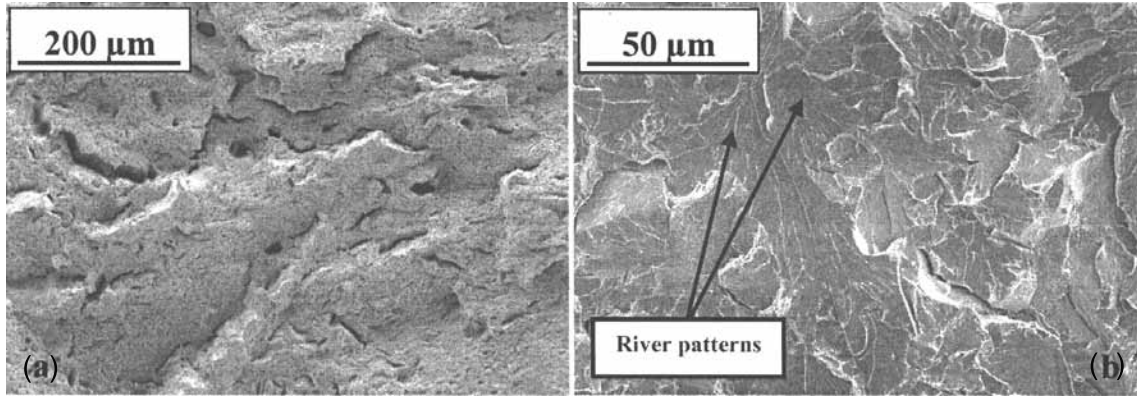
Fracture mechanisms of the 16MnNiMo5 steel (a) ductile fracture at -60°C , (b) brittle fracture at -196°C
